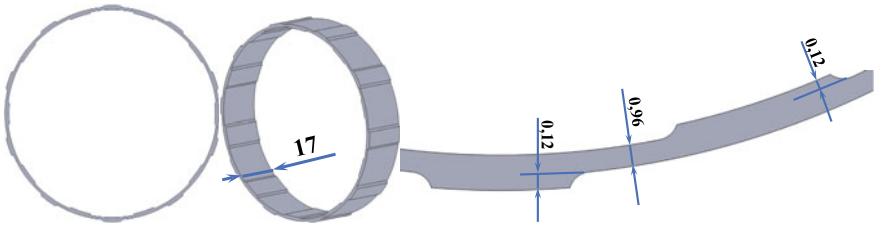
CAD model of an elastic ring with 10 grooves (mm)
